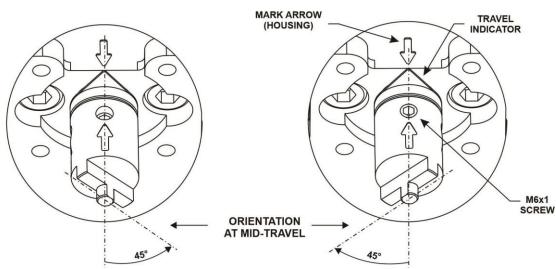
Rotary adaptor assembly orientation on actuator
